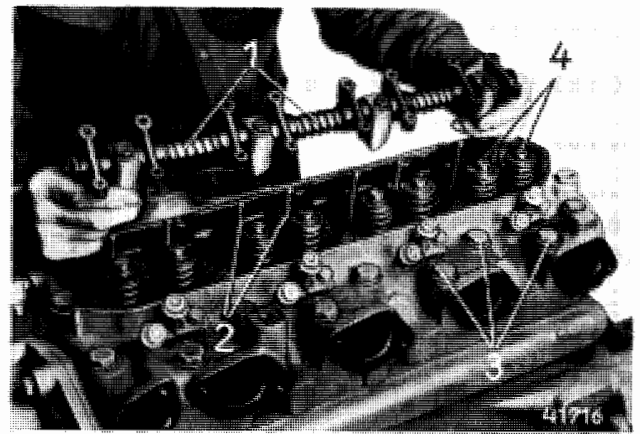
Removal of Rocker Arm Shaft Assembly
